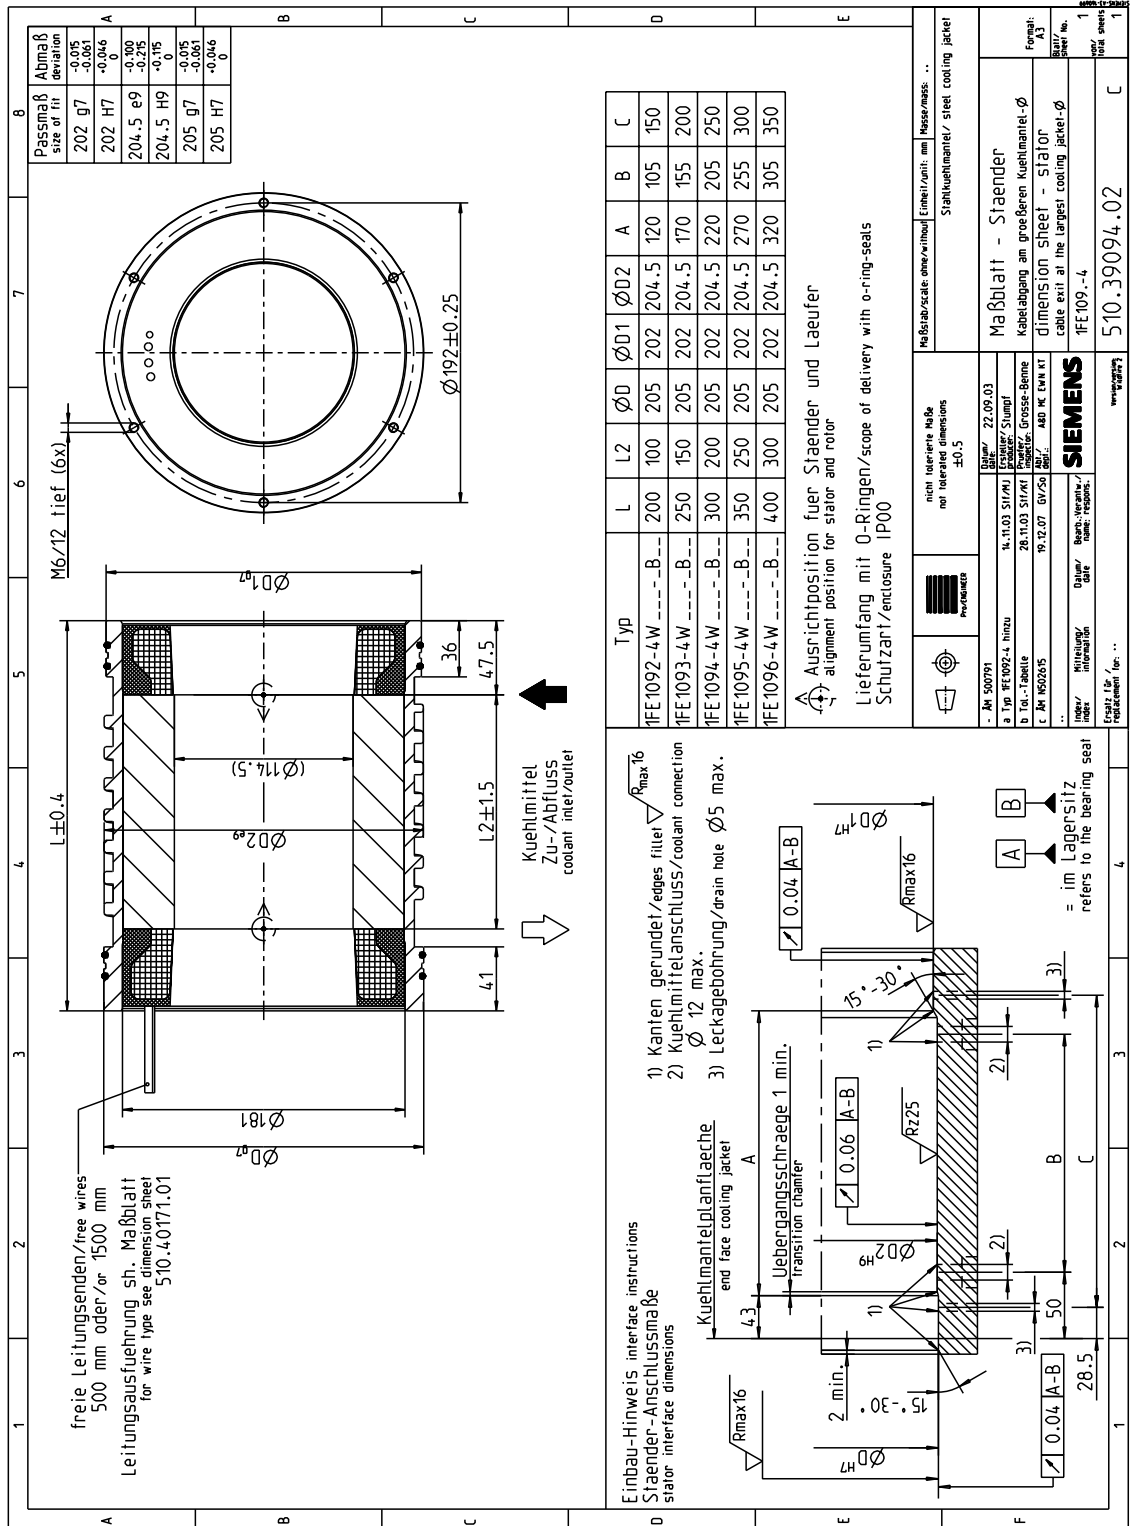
1FE109□-4, stator with cooling jacket, cable outlet at the larger cooling jacket diameter
